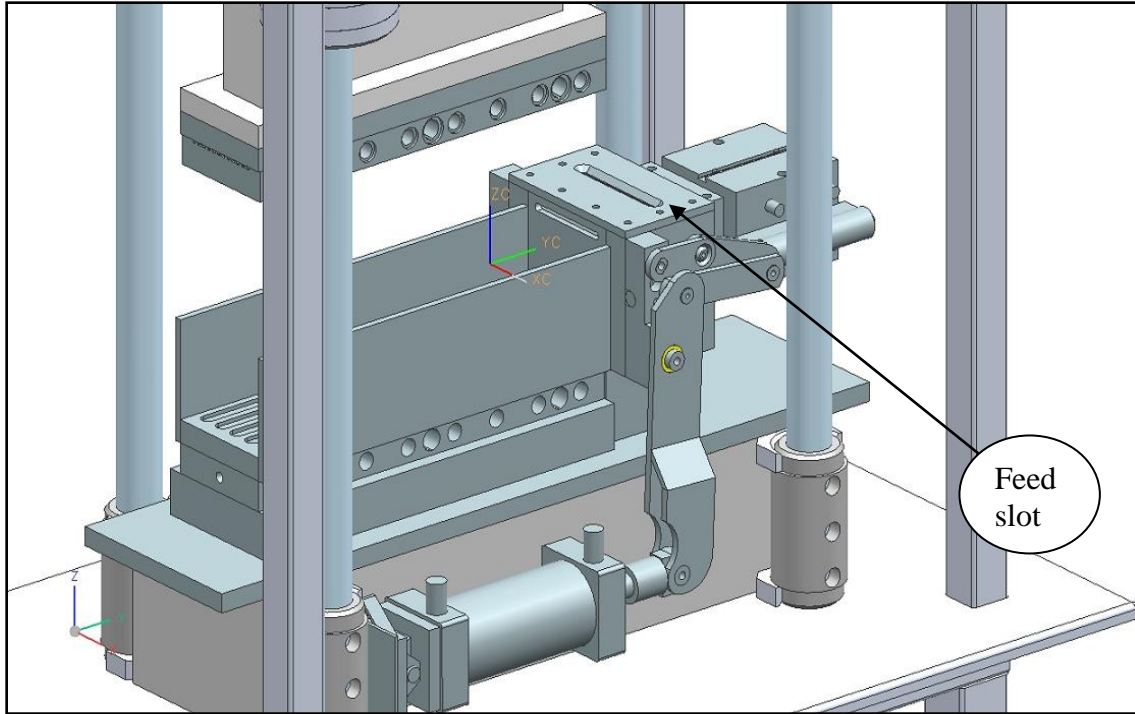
Schematic Diagram of Press and block-die system in custom built compression molding
